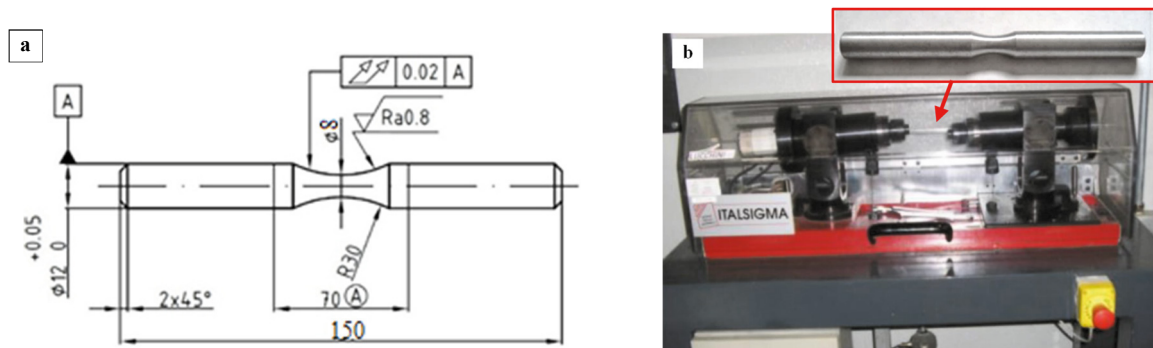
a) the shape and dimensions of the specimen for fatigue test; b) the experimental testing device for rotating bending fatigue tests in Department of Mechanics, Politecnico di Milano, Italy - detail, where the sample is clamped
